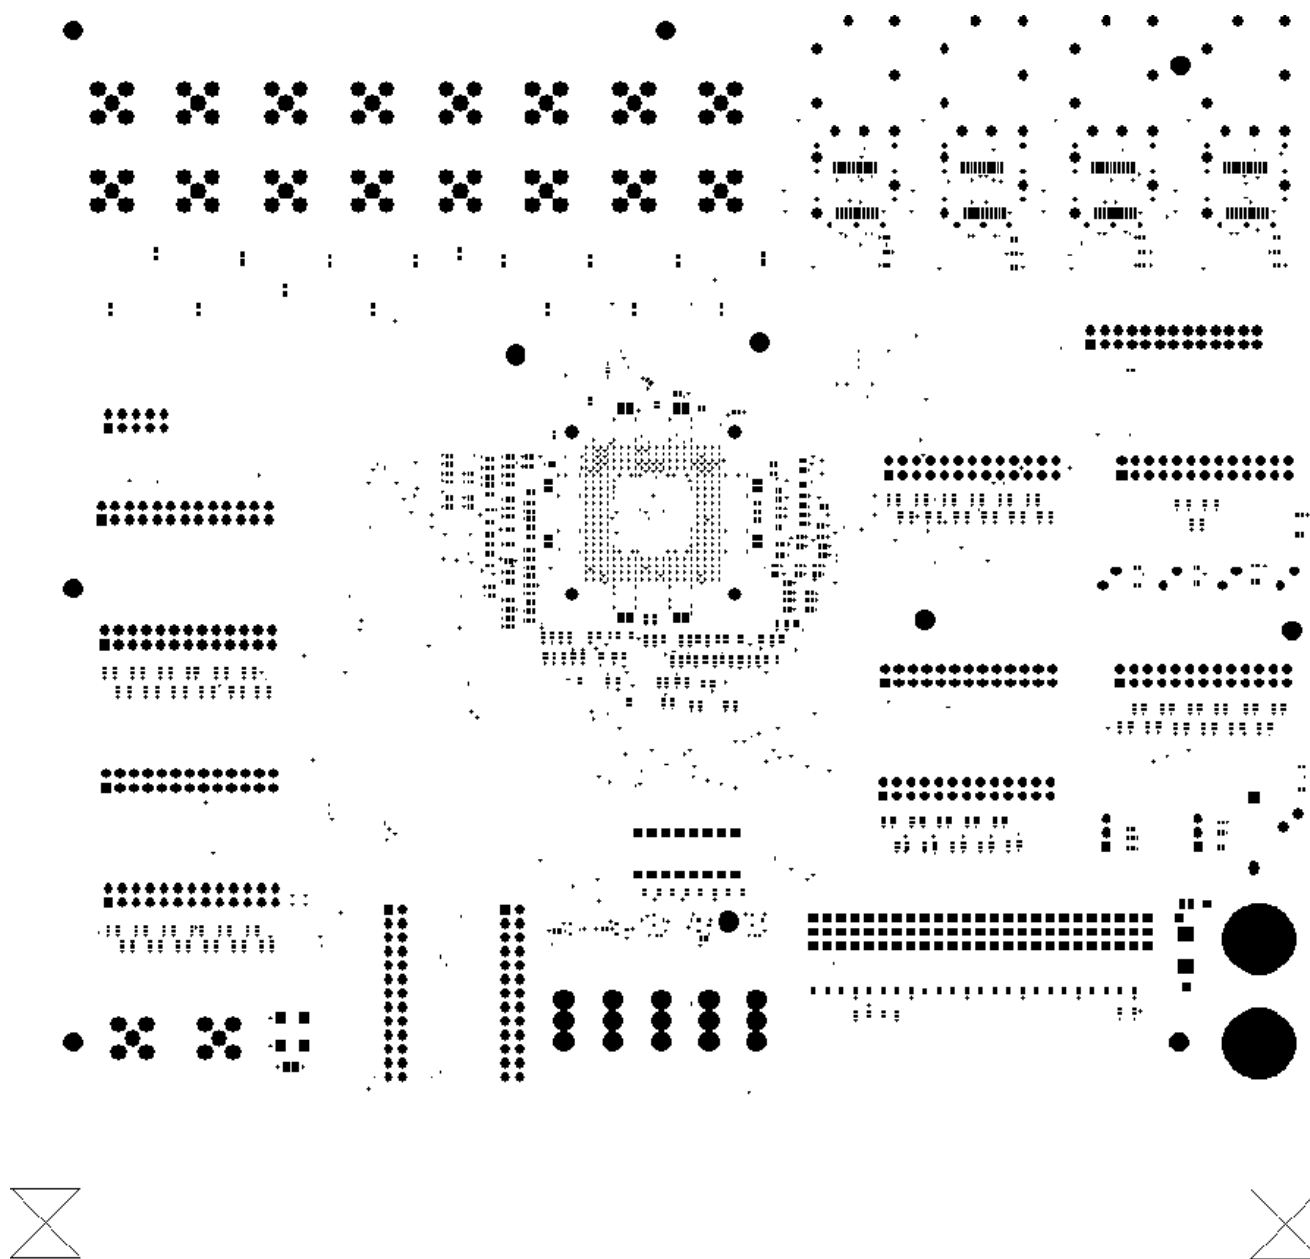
CYP15G0401DXB Eval Board Top Solder Mask Layer
